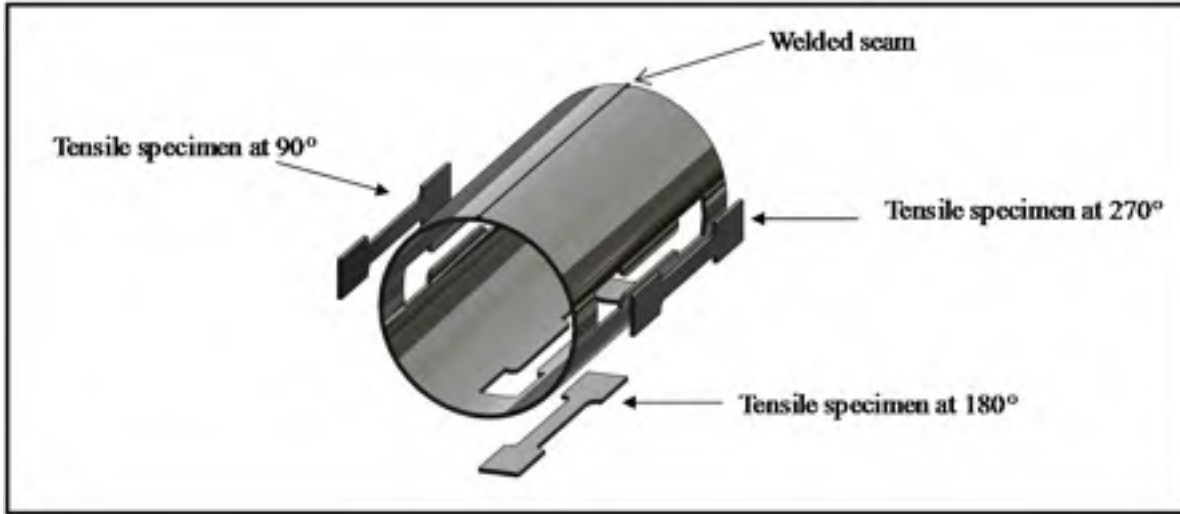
Location of the tensile specimens extracted from seam welded SS 304L.
